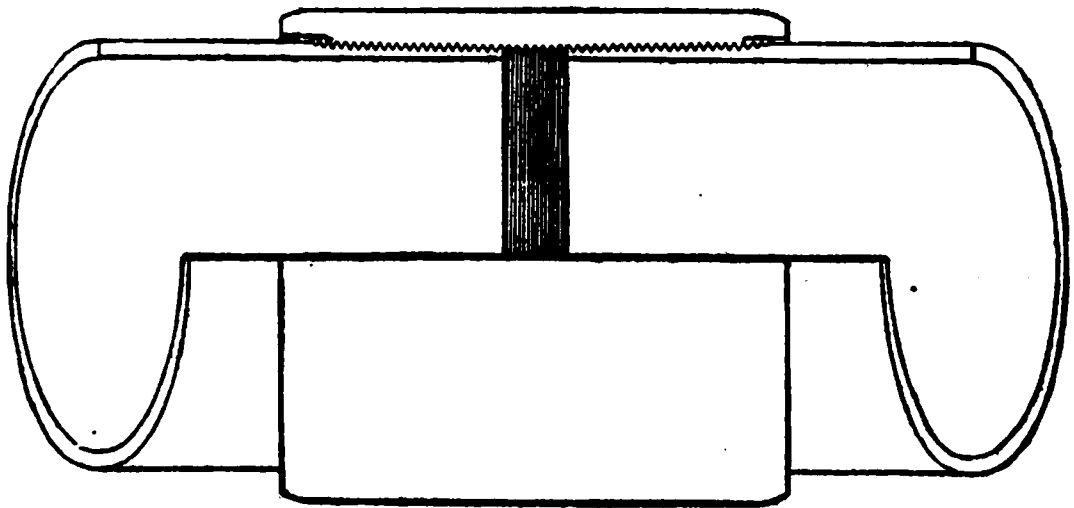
Typical Section of Boston Casing — Pacific Coupling and Joint
